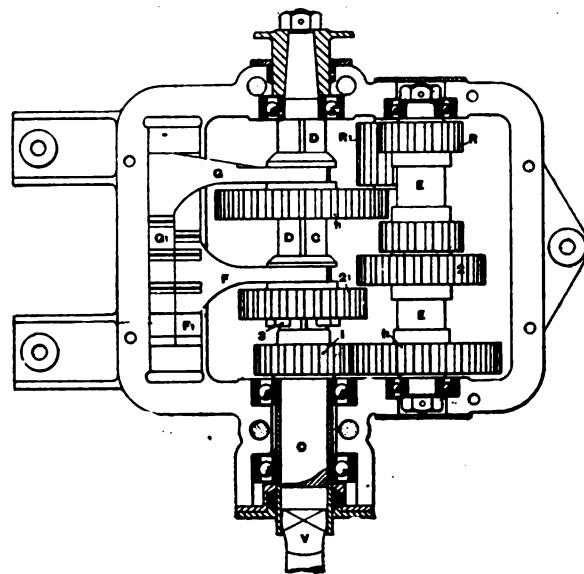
Sectional View of Vauxhall Change-Speed Gear.
